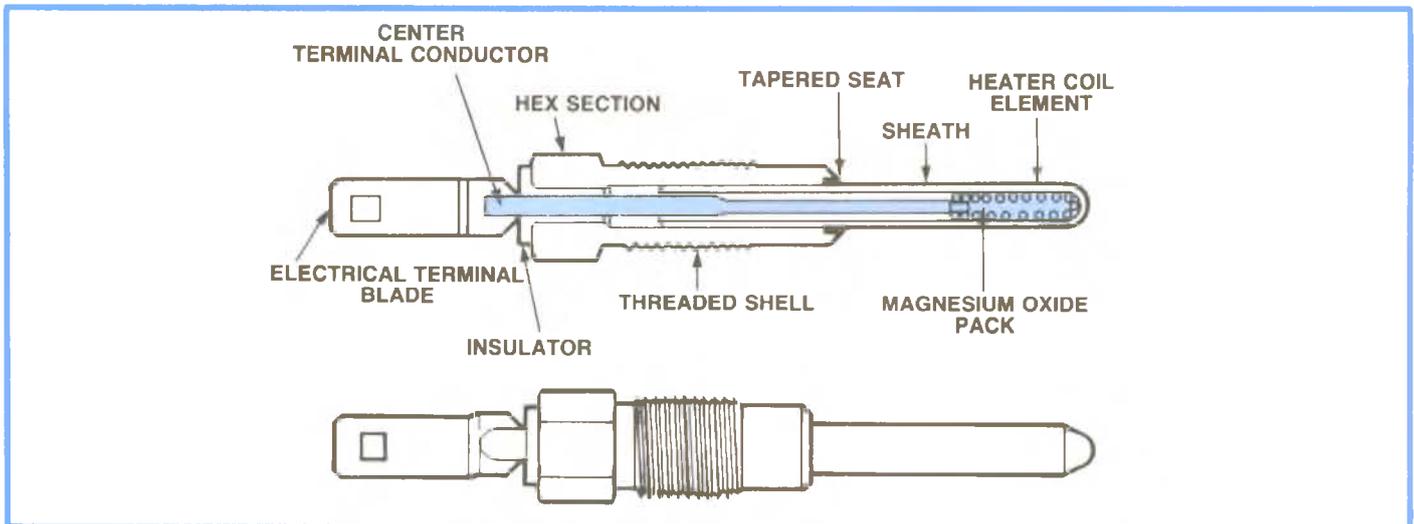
, Typical AC Diesel Engine Glow Plug.
